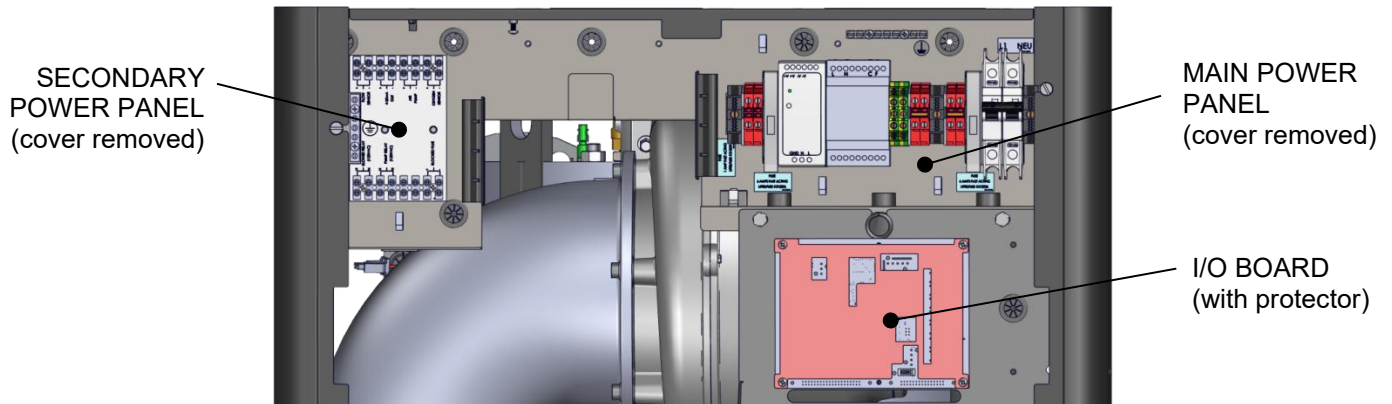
Power Panel and Input/Output (I/O) Board Location
